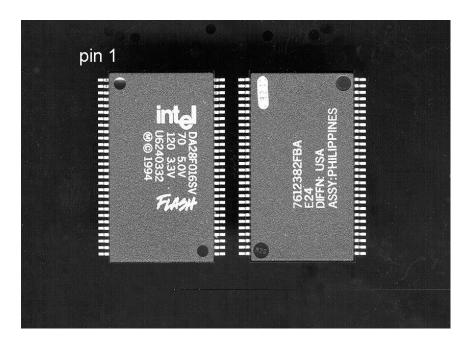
Optical photograph showing part markings. Left: Top marking. Right: Bottom marking.
